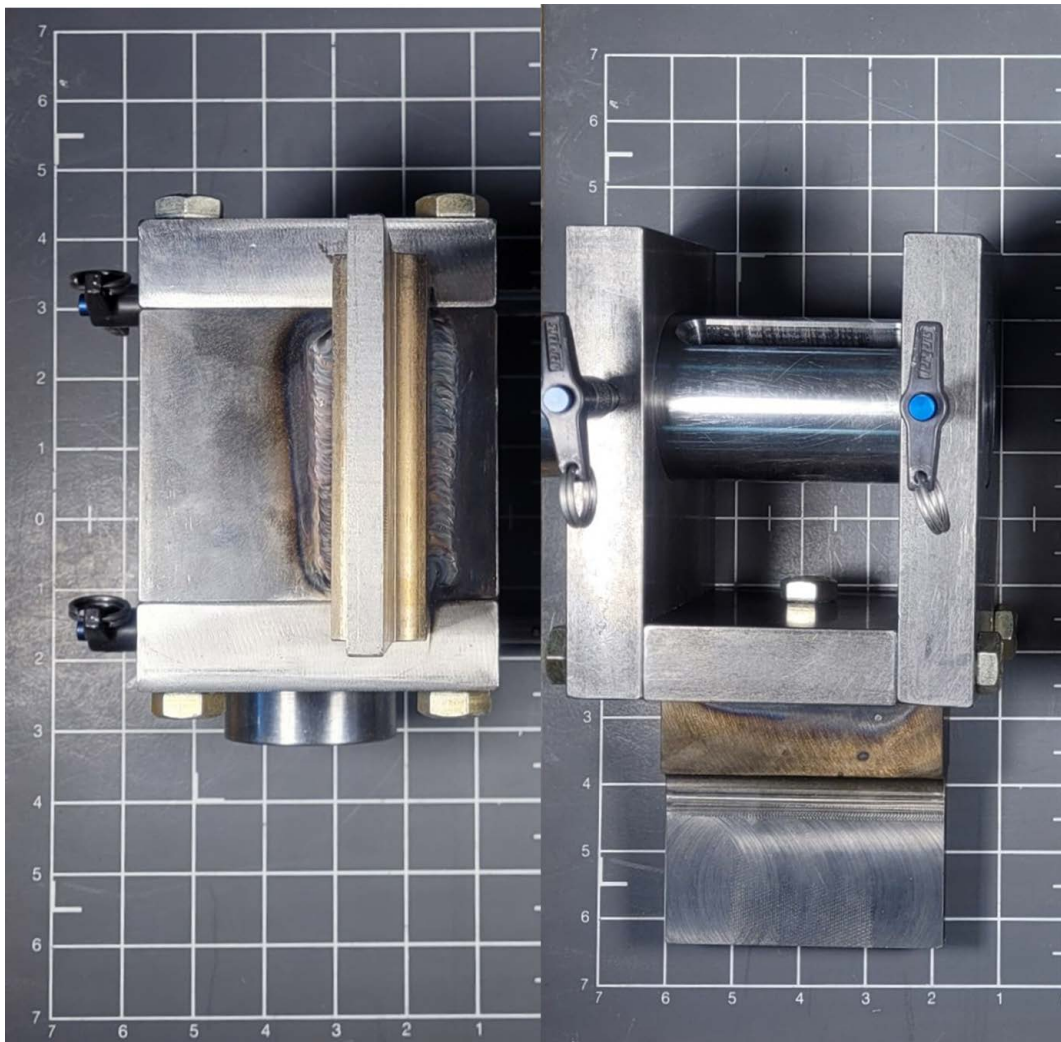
Bottom and side view of custom capstan grips manufactured for tensile testing of UHMWPE composites.
